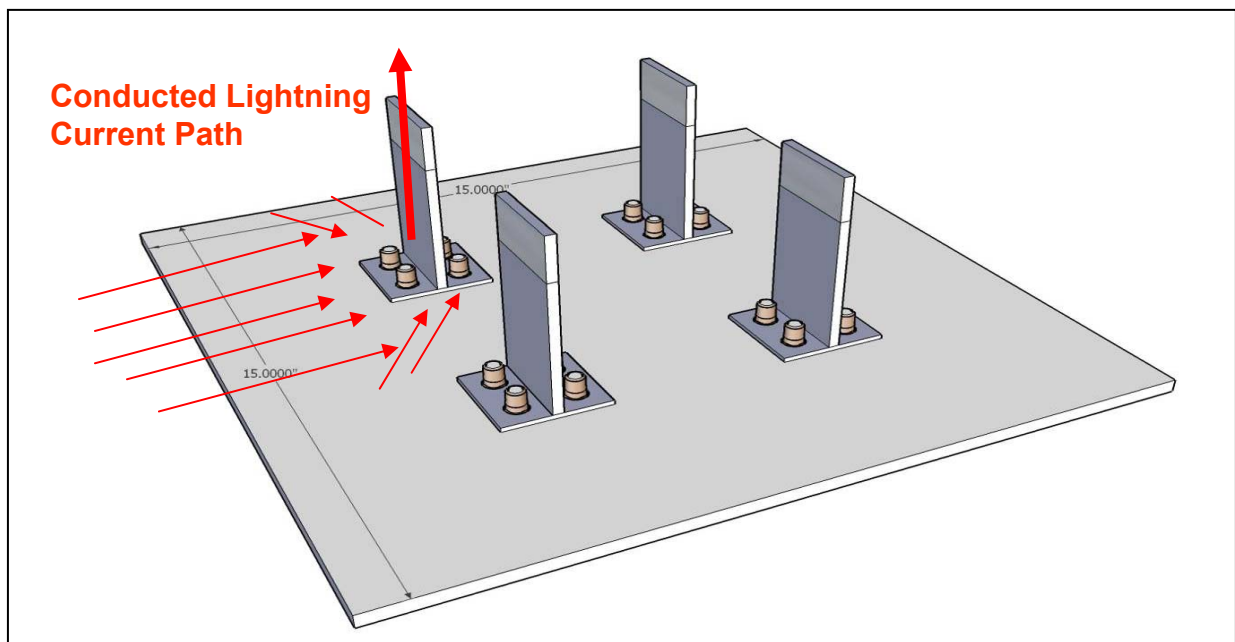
General Test Arrangement for Fastener-Related Failure Conditions; Test Current was Conducted from Skin Panel to Shear Tie
